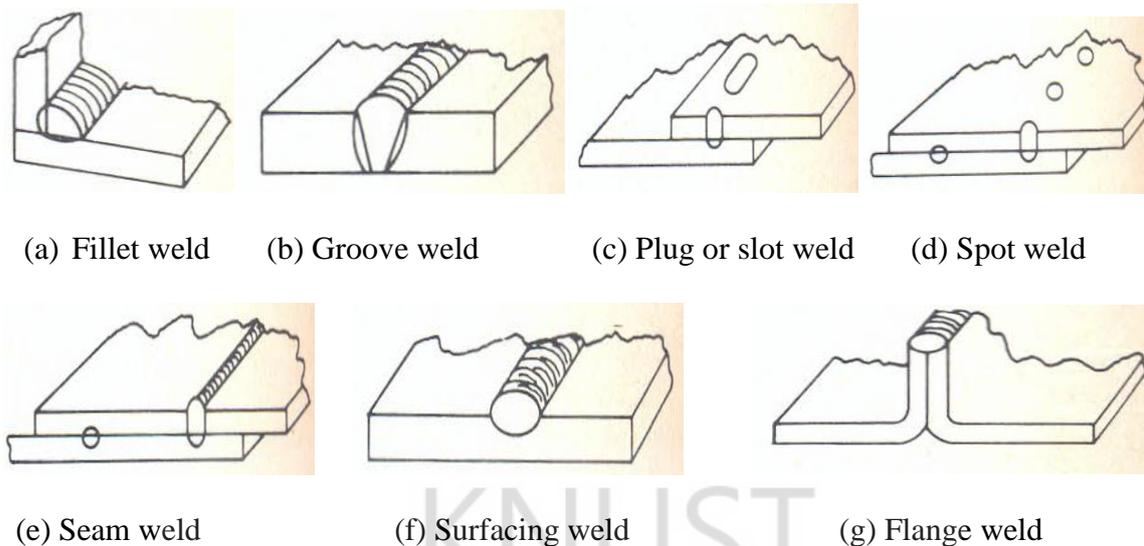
Basic types of welds (Cary, 1997)
